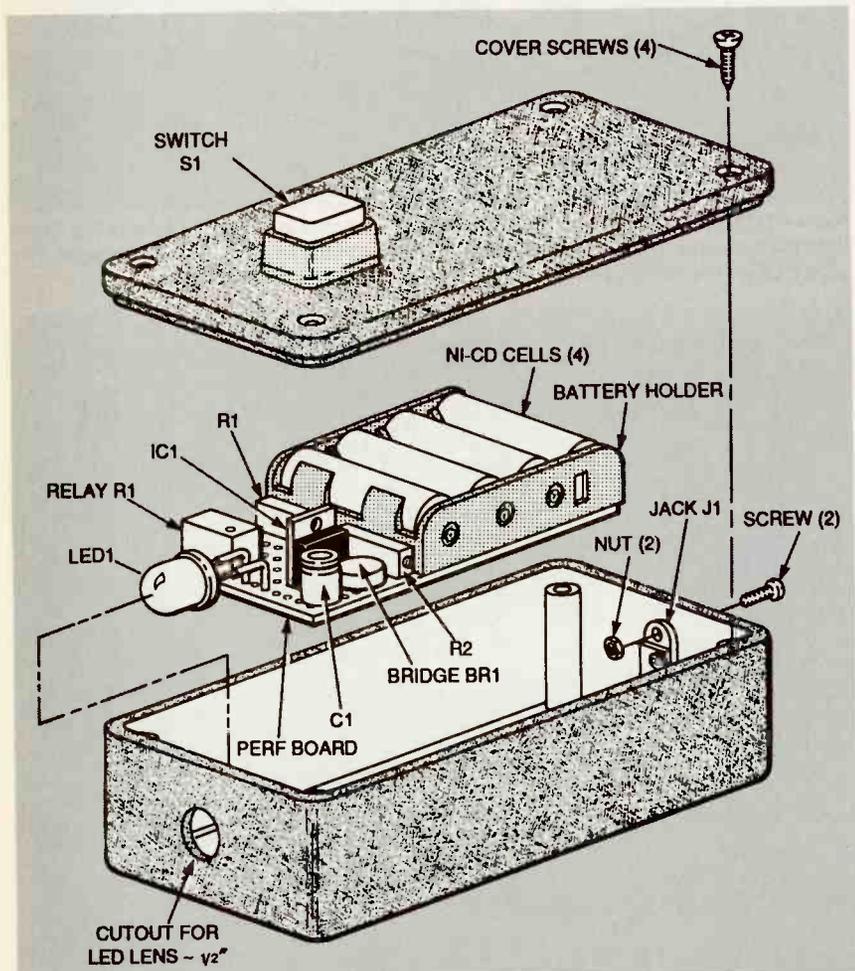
FLASHLIGHT MODULE ASSEMBLY. The circuit board contains the electronic components and battery holder. The LED lens projects through a hole in the case. Jack J1 is at the other end of case, and switch S1 is on the cover.
